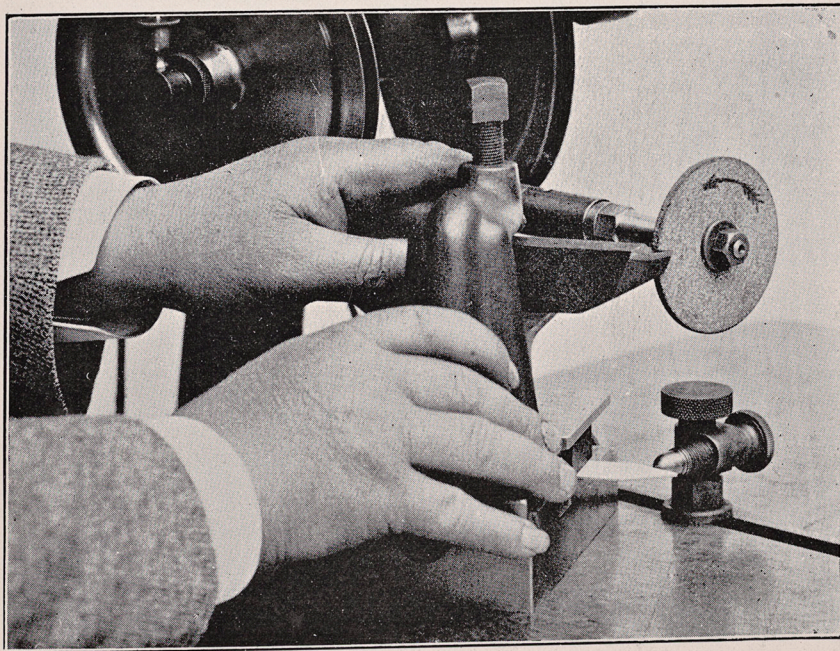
Grinding a Lathe Tool for cutting V threads.
